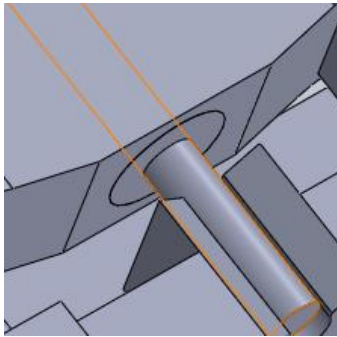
Non-Flanged Bearings in Last Year's SolidWorks Motor Assembly
